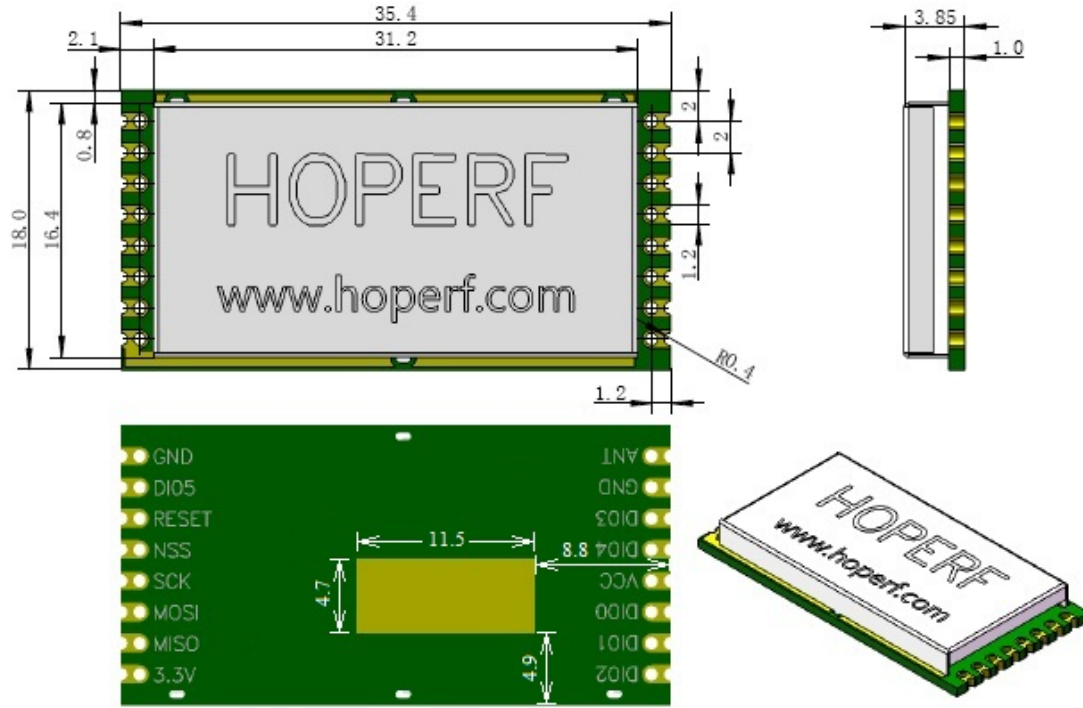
RFM98PW/RFM95PW Mechanical Dimension
